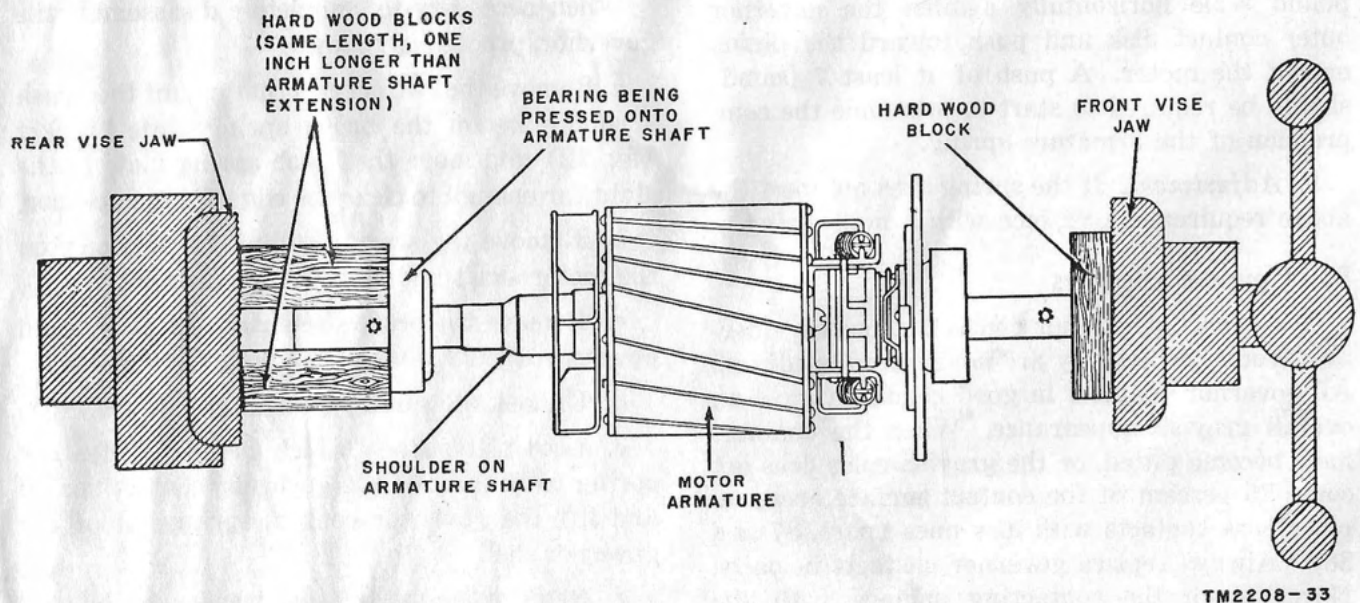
Pressing armature bearing onto its shaft by use of a vise.
